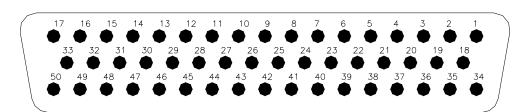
C OUTLINE DRAWING REAR MOUNT
